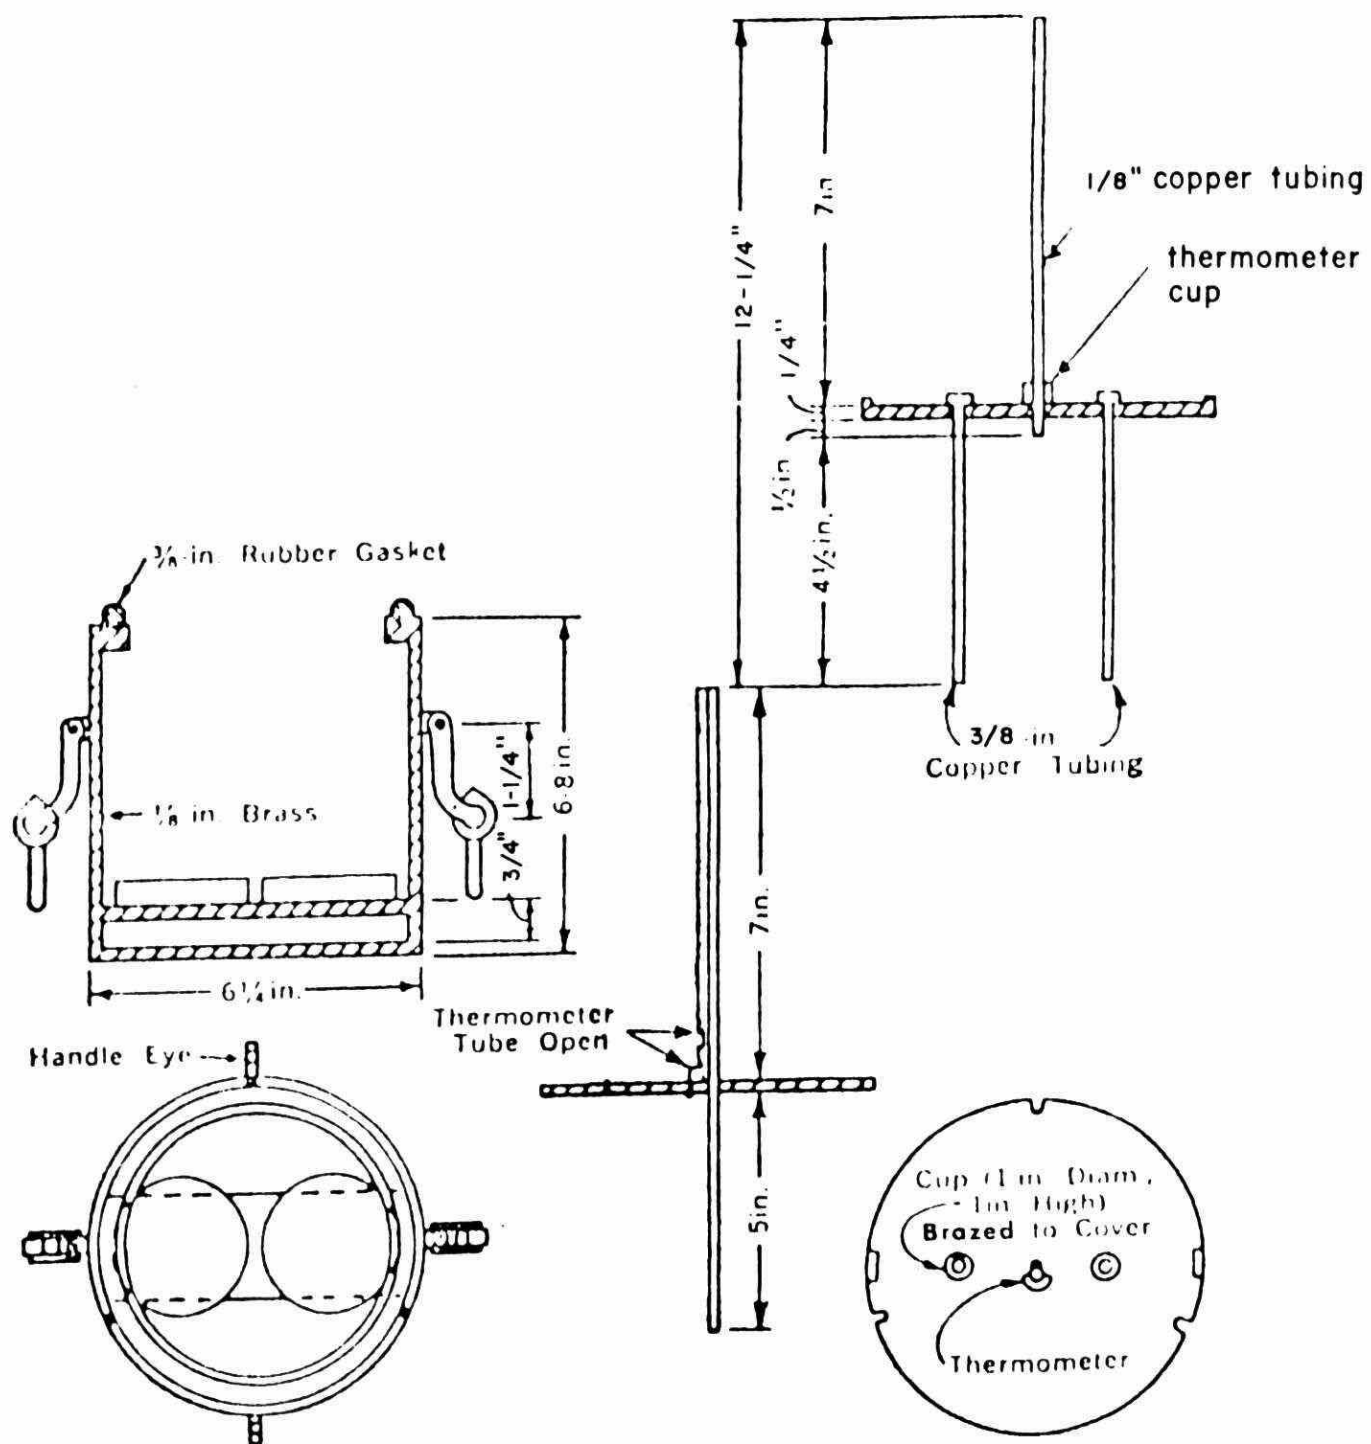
DO AND BOD SAMPLER ASSEMBLY
